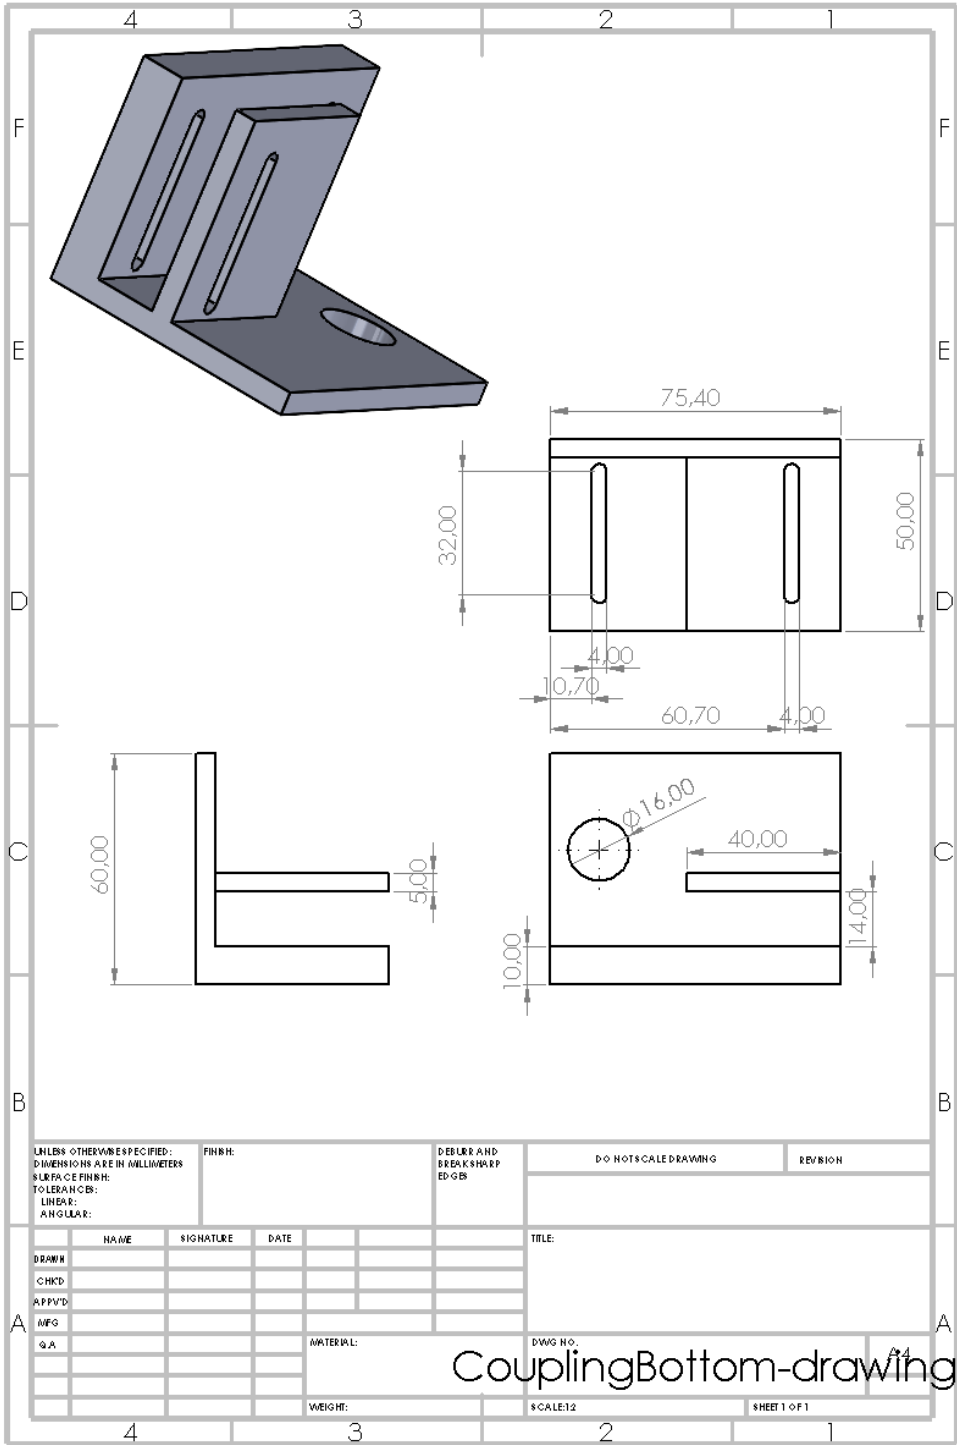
Technical drawing of the bottom coupling part of the hydrodynamic test-setup.
